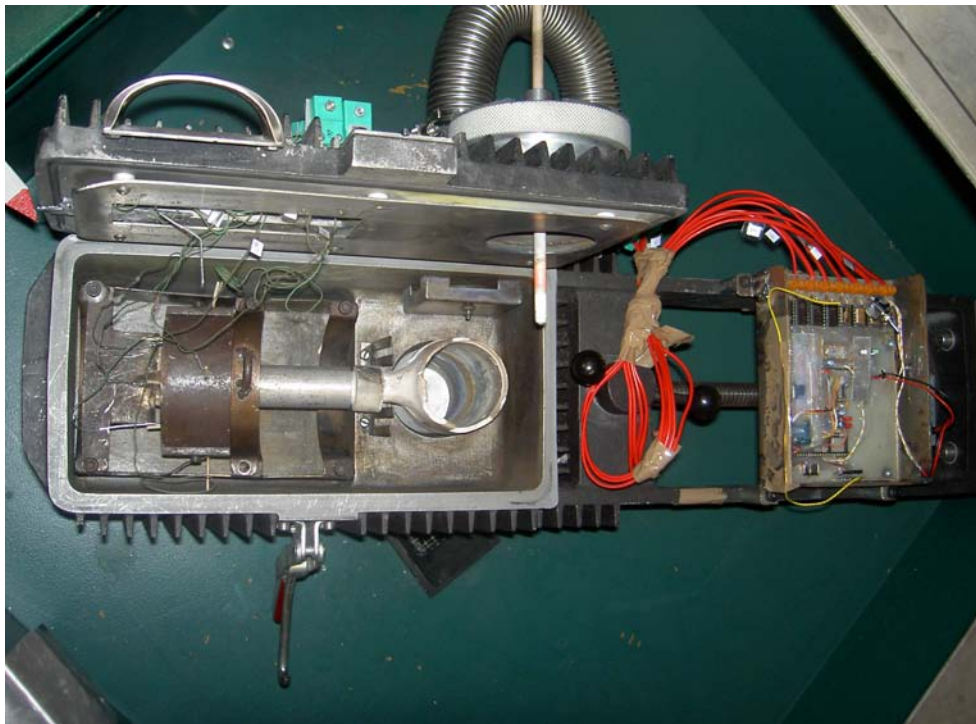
b - Temperature acquisition during centrifugal casting – vacuum chamber opened
